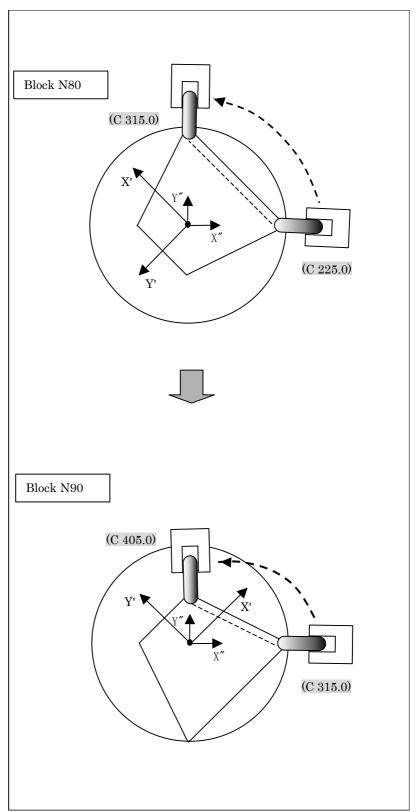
(d) Exploded View of Each Block (2)
